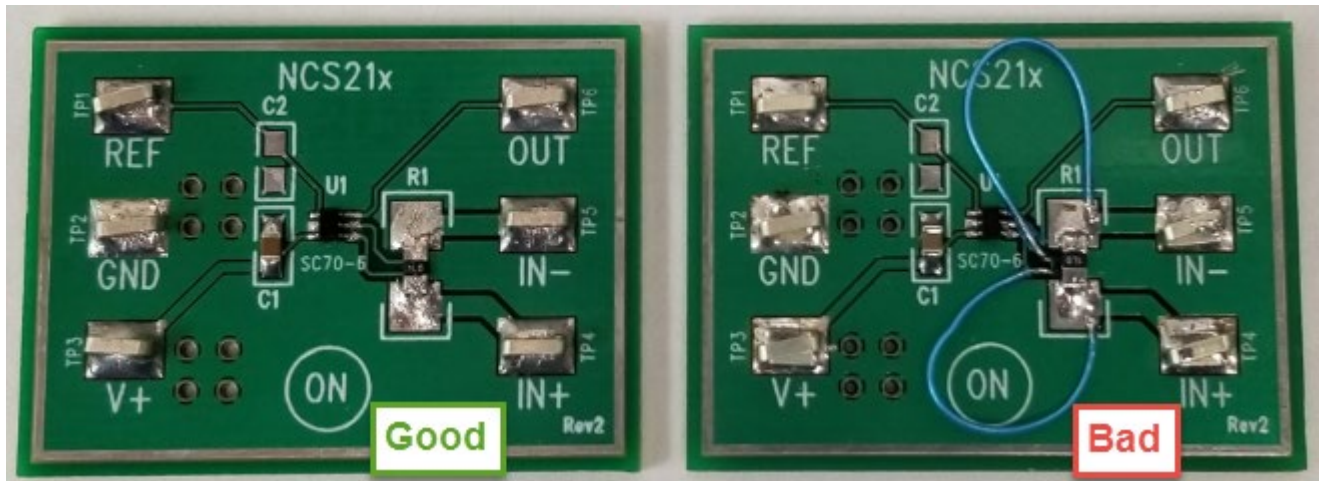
NCS21xR Customer Evaluation PCB Layout with Optimized Connections to Shunt Resistor
